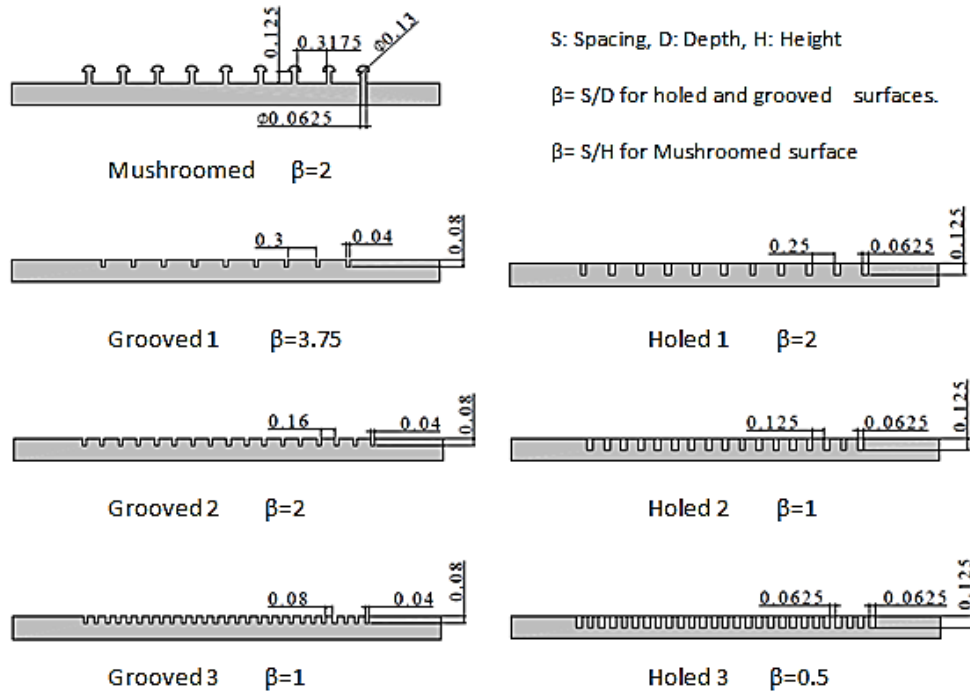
Cross section of structured surfaces (dimensions in inches)
